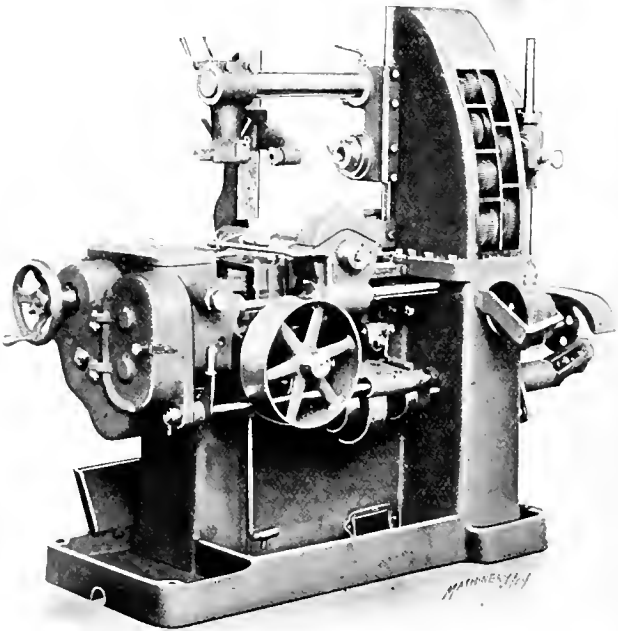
Rear View of No. 3 Machine, showing Driving Connections
